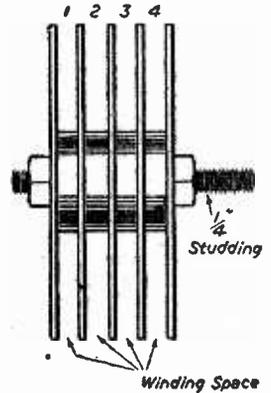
Bobbin assembled on $\frac{1}{2}$ in. rod for holding in winding mechanism. This can be an ordinary geared drill brace or a specially built machine.
